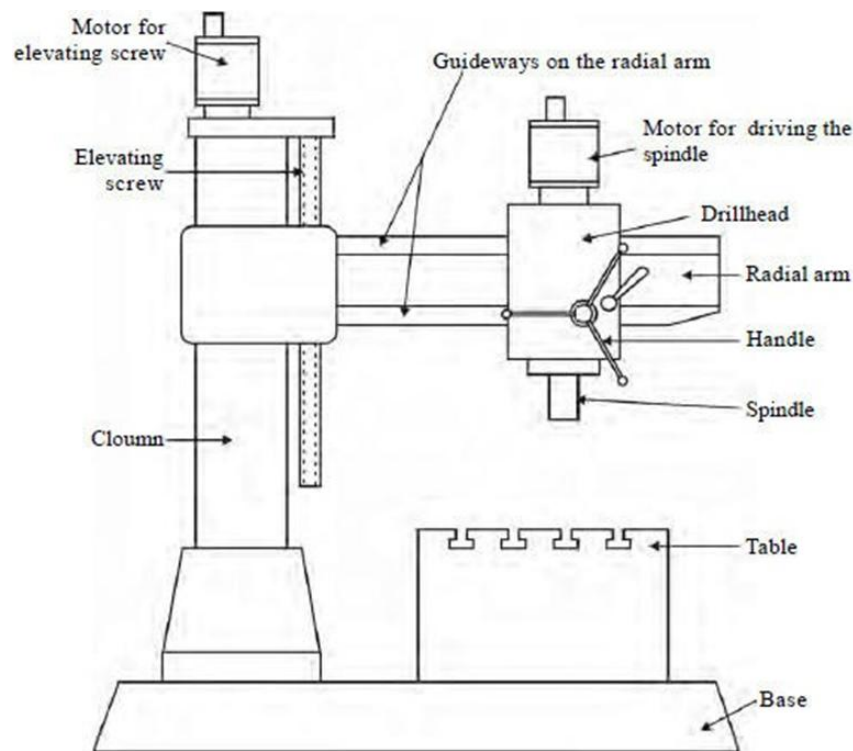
Schematic of Radial Drilling Machine [Rathi, 2014]
